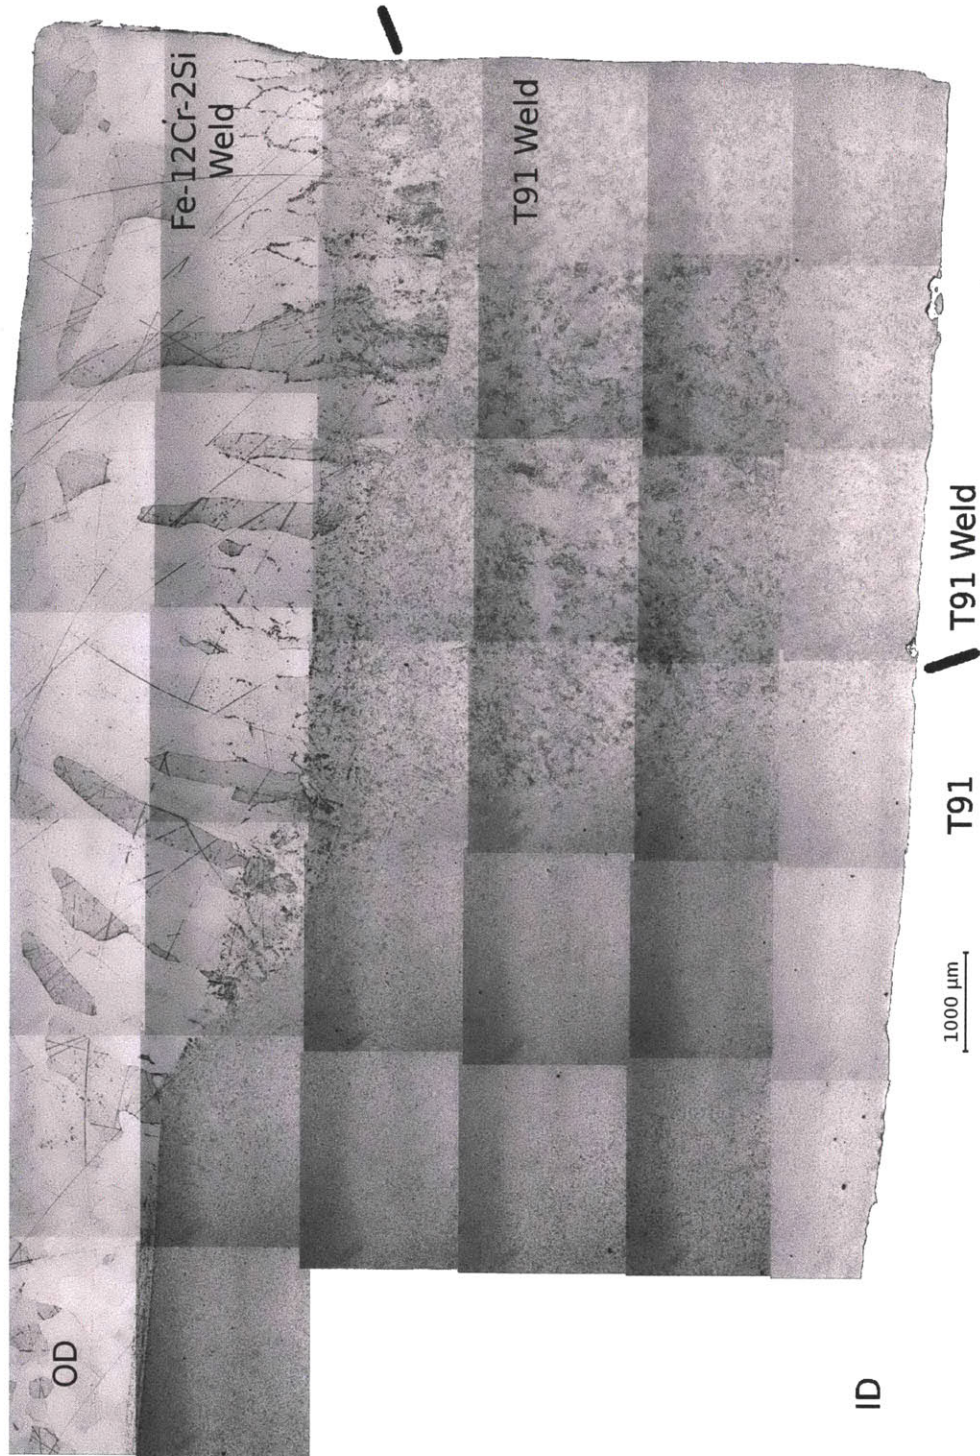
Photo montage of the ASME-certified OD-clad weld, made by grinding a double bevel, filling the weld to 7 mm (0.275") with F91 weld wire and finally back-filling the weld with Fe-12Cr-2Si. Note the lack of any appreciable HAZ, showing that the proper quench and tempering heat treatment for F91 was performed. Individual images were taken at 50 $\times$ .
